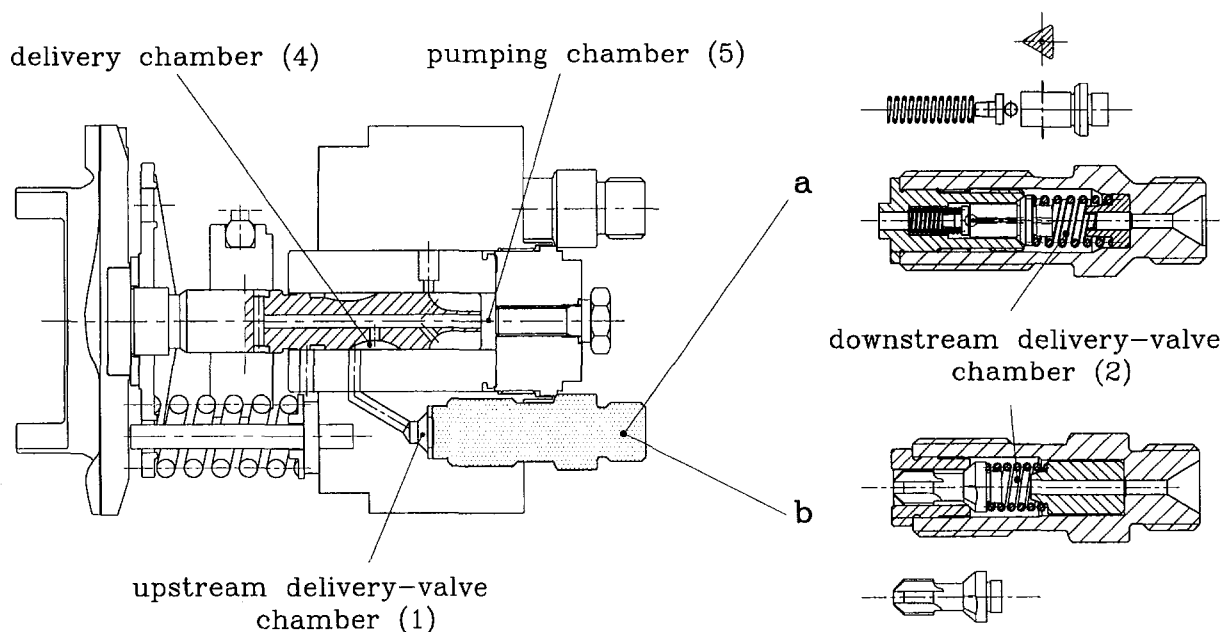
High-pressure portion of the pump and delivery-valve assembly with constant-pressure valve (a) and reflux-hole valve (b)
